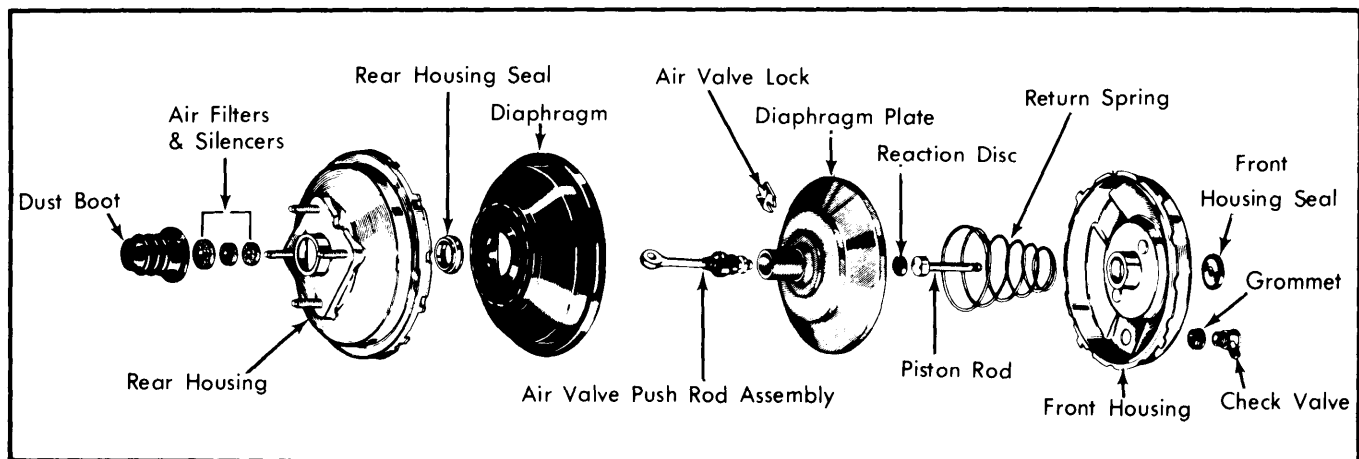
Exploded View of a Bendix Single Diaphragm Assembly
